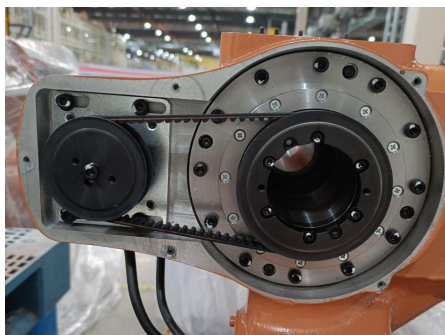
J4, J5, J6 synchronous pulley belt inspection
